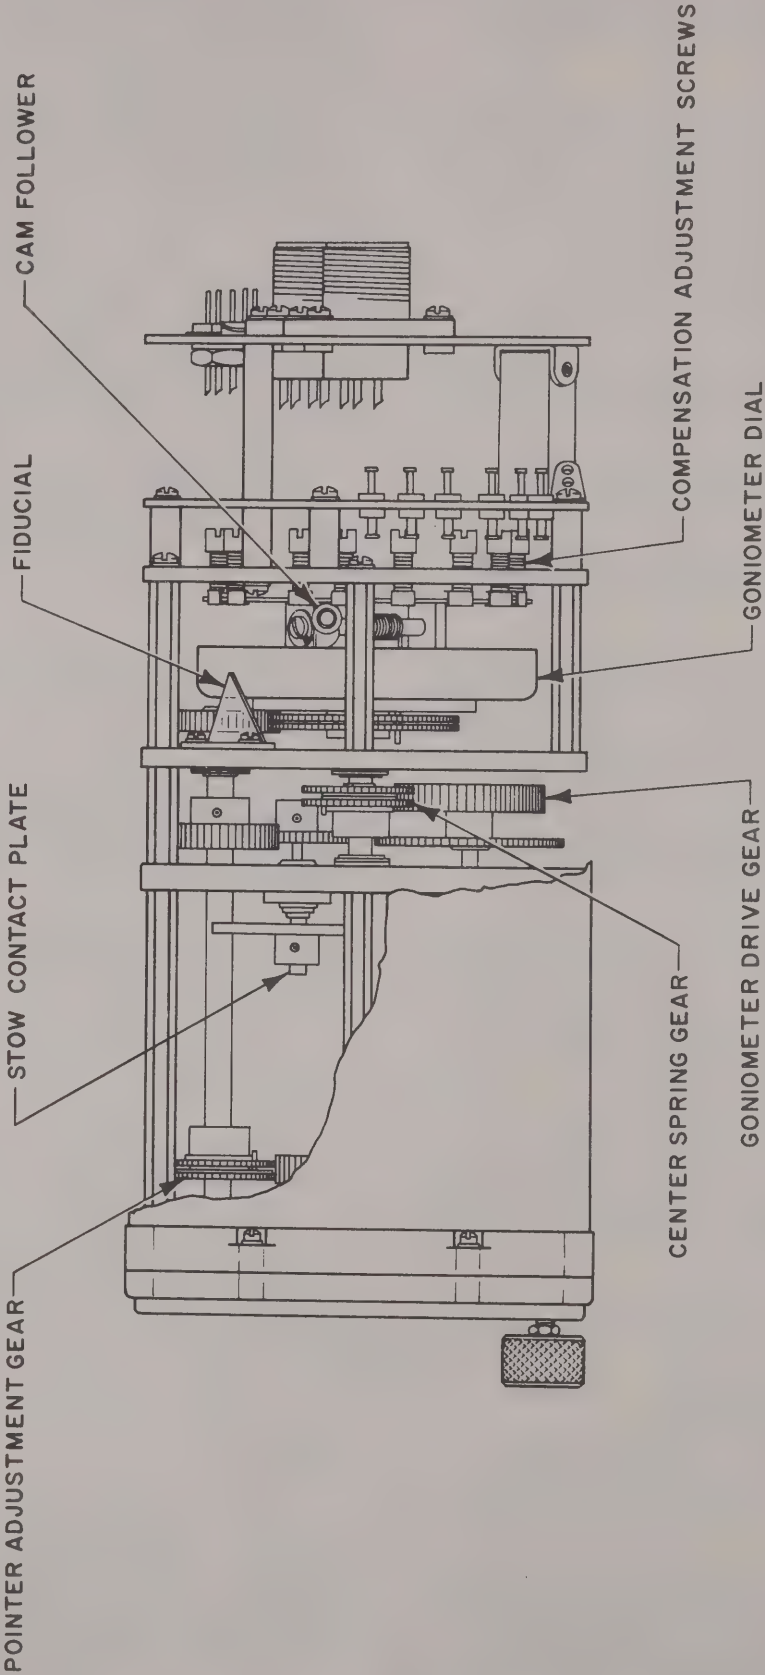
IN-346C Goniometer-Indicator, Alignment Points
